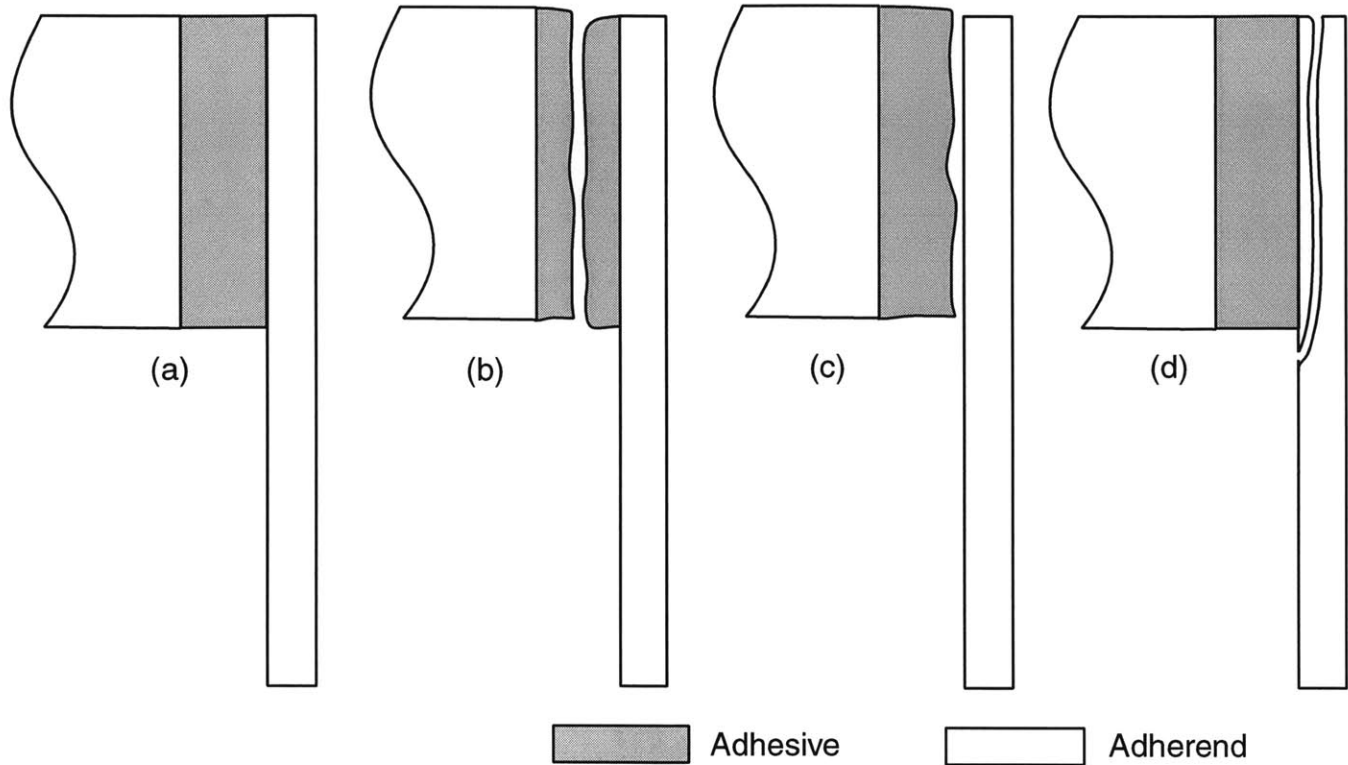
Types of bond failure under shear loading. (a) As-cured specimen, (b) cohesive bond failure, (c) adhesive bond failure, (d) adherend failure.
